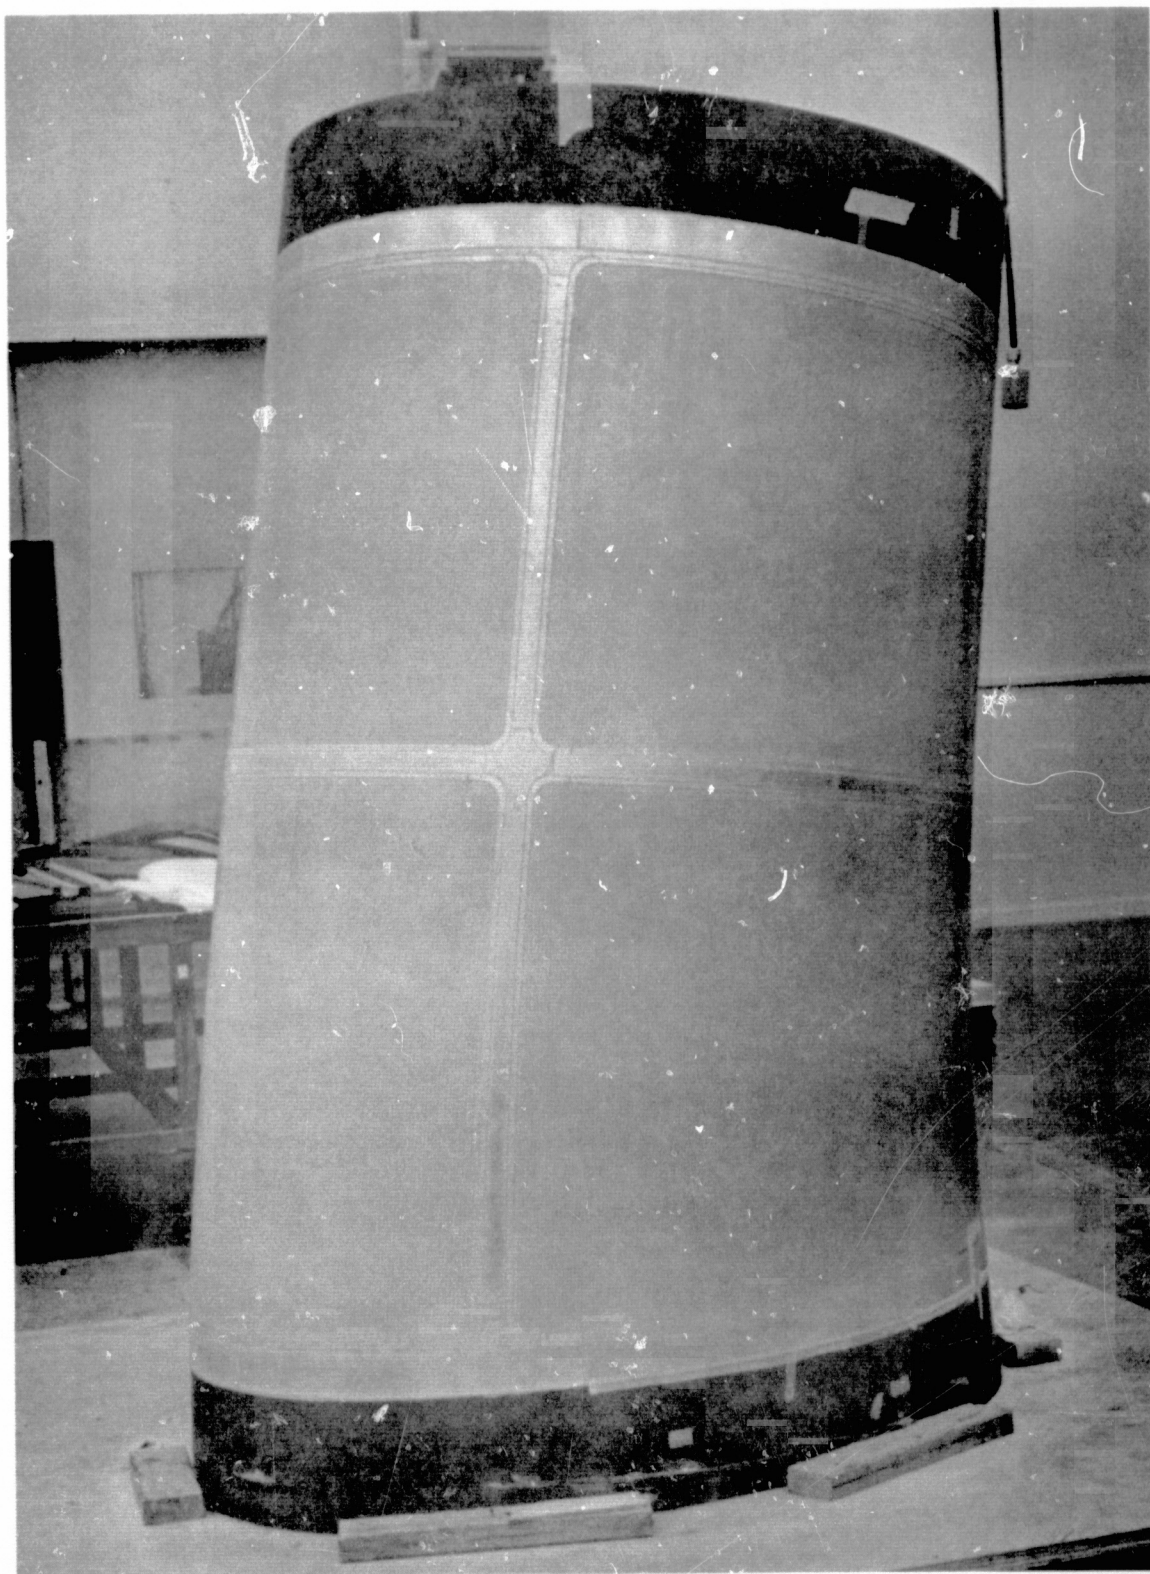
JT8D Refan Center-Engine Inlet-Duct Bond-Assembly Jig
